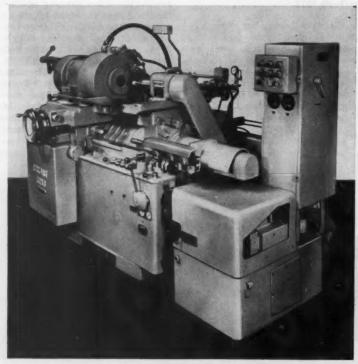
Colored lights and a special panel will demonstrate the grinding cycle and operation of this automatic machine
